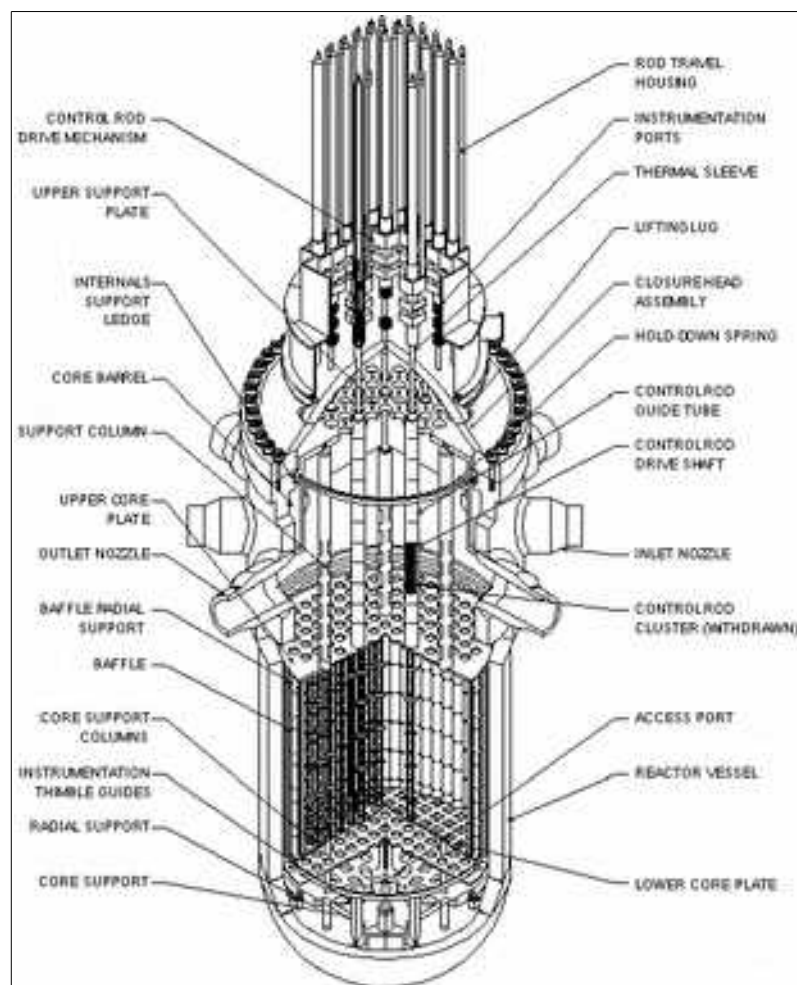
(a) : PWR fuel assembly with control rod drive [wikipedia]
